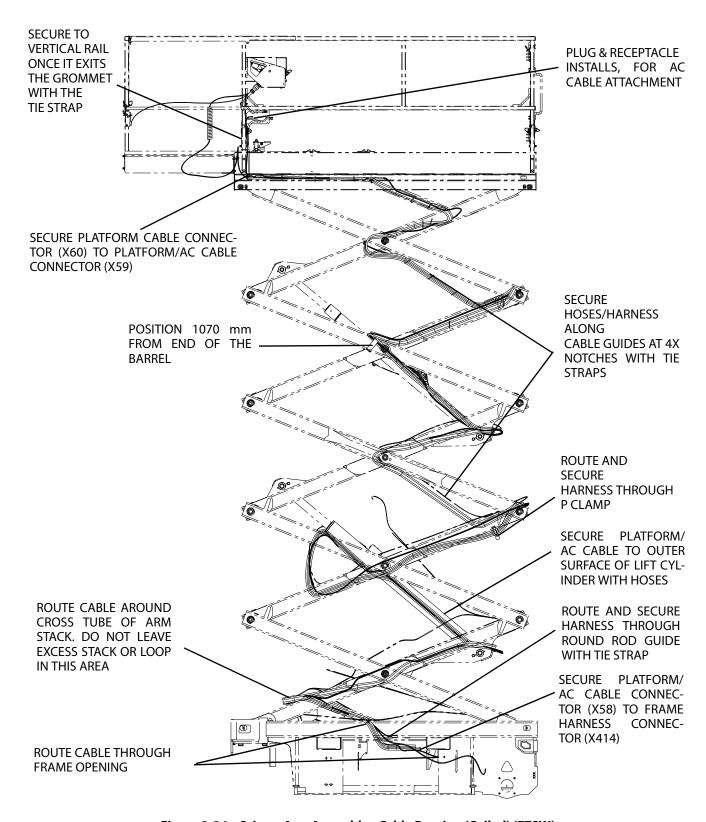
Scissor Arm Assembly - Cable Routing (Coiled) (FTSW)
